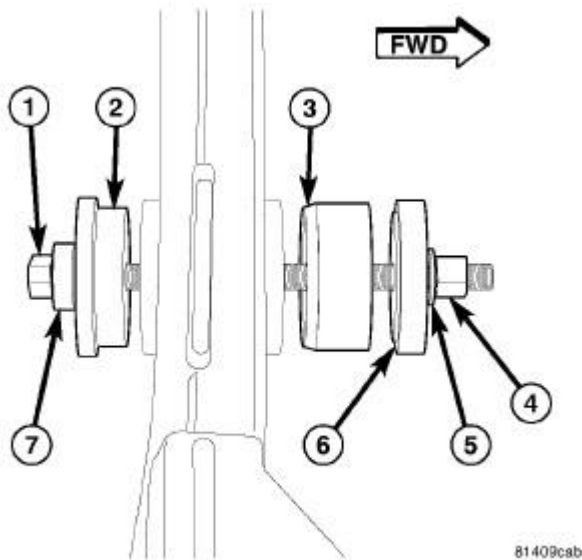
TOOLS ASSEMBLED FOR BUSHING INSTALLATION
